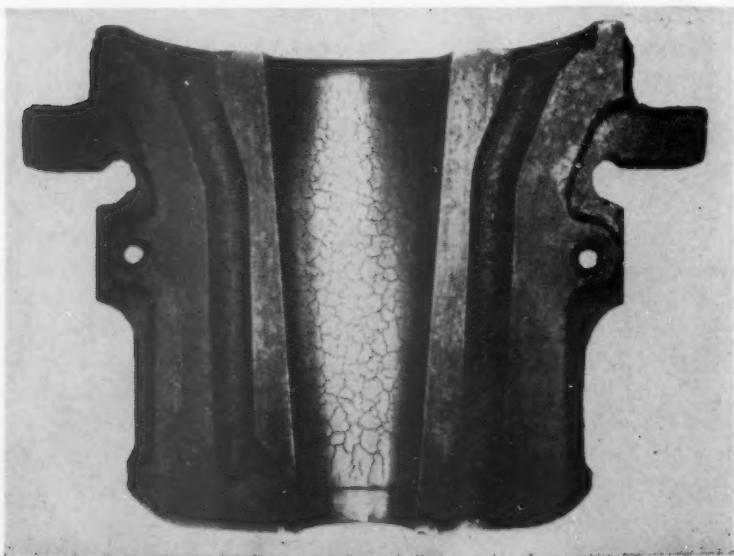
SUCTION BLANK MOLD SHOWING NETWORK OF WELL-DEVELOPED HEAT CHECKS.
